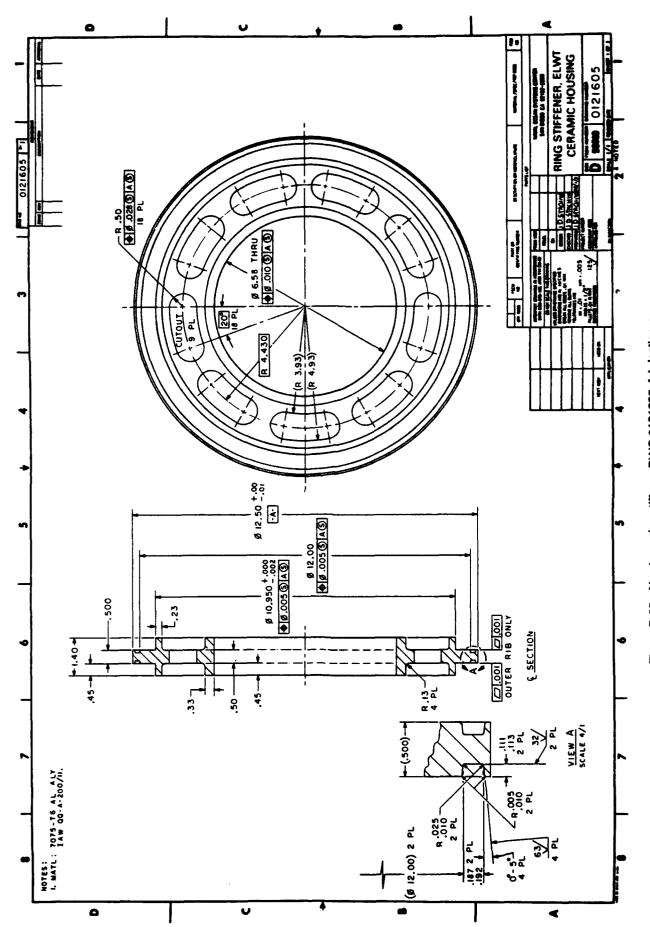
Aluminum ring stiffener DWG 0121605; fabrication or all-
